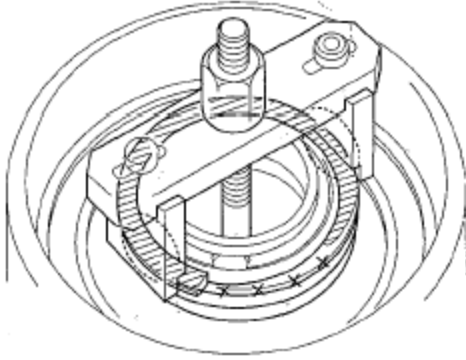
Identifying Clutch Spring Compressor Attachment Position
